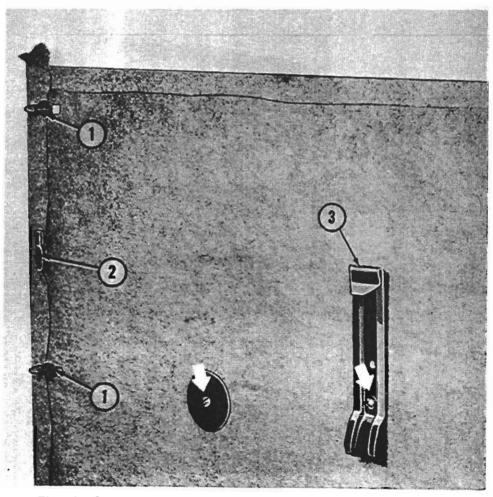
Front Door Trim Panel Fasteners and Arm Rest Clip and Retaining Screws.
